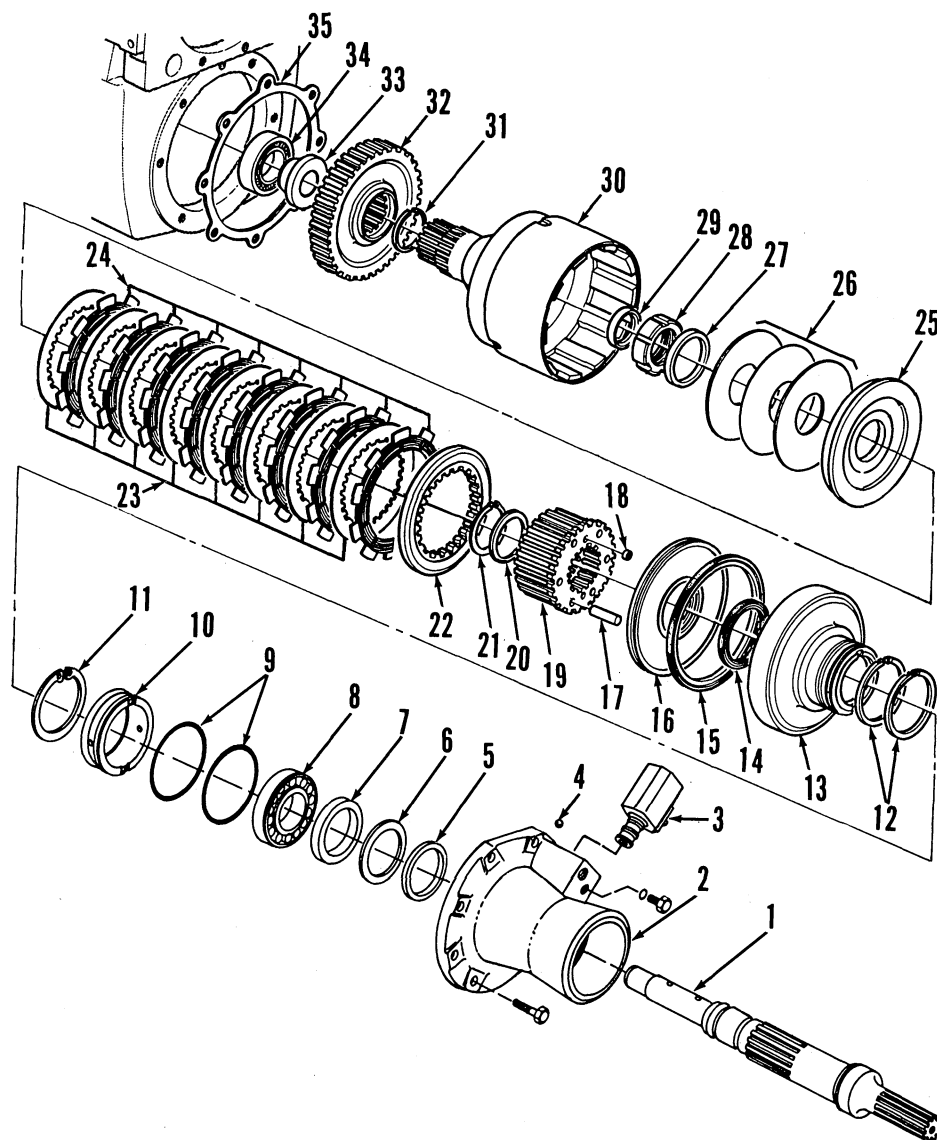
Exploded view of MFWD clutch assembly used on tractors equipped with Quad-Range transmission.
